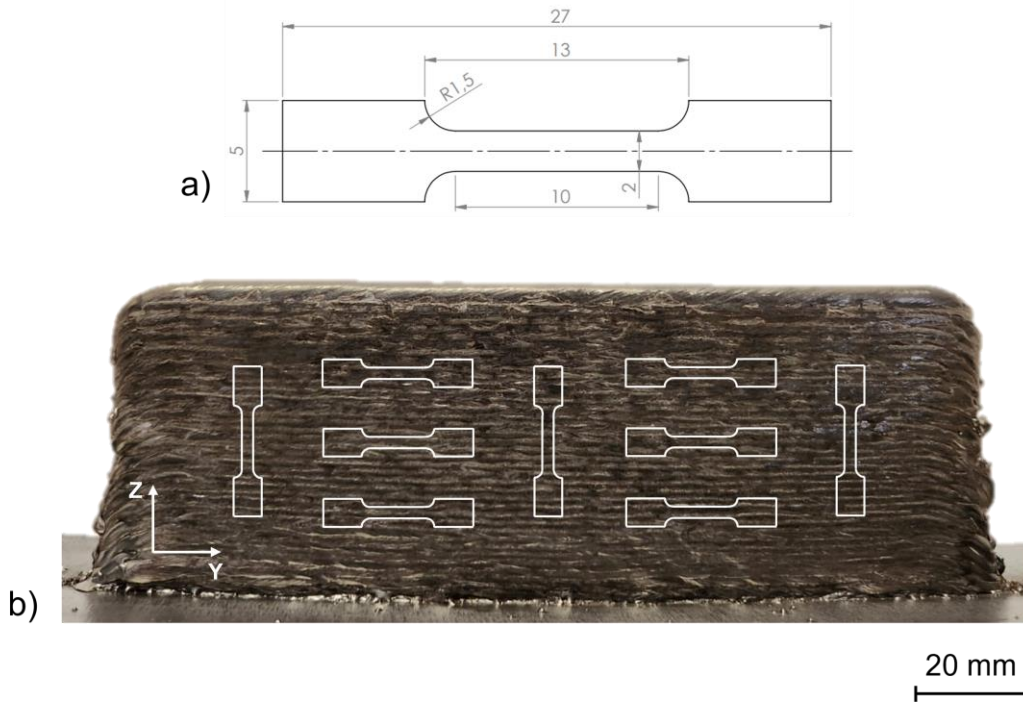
Uniaxial tensile test specimens: a) dimensions (Adapted from [40]); b) removal location
